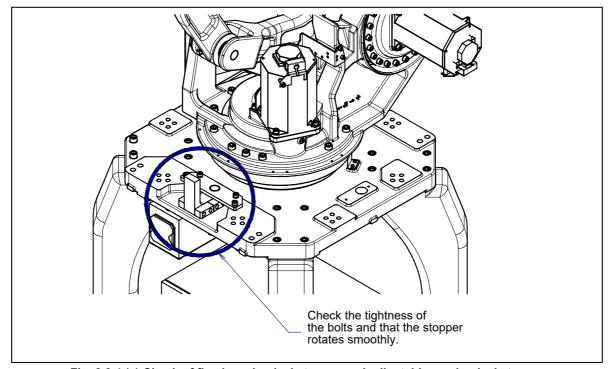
(a) Check of fixed mechanical stopper and adjustable mechanical stopper
